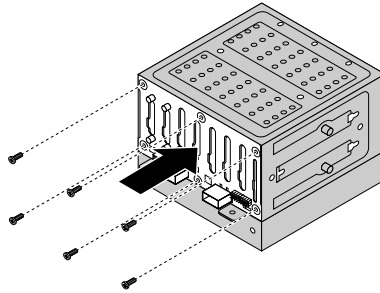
Installing the 2.5-inch hot-swap hard disk drive backplane
